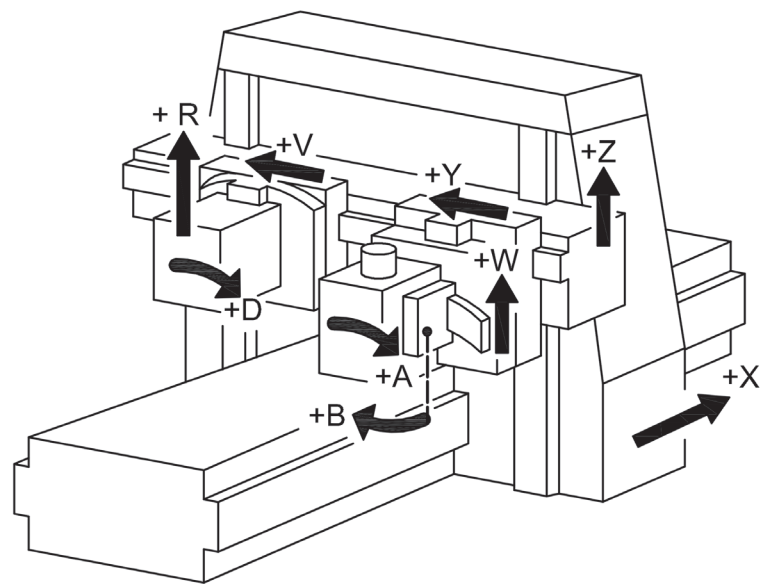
Example of a double column bed-type milling machine with moveable portal (gantry milling machine)
